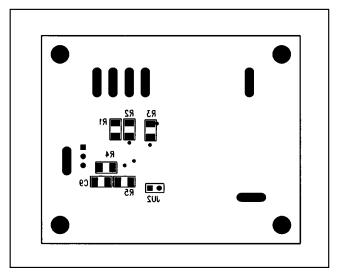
MAX747 EV Kit Component Placement Guide—Solder Side
